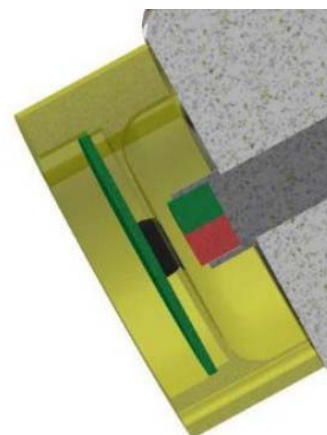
The earth's field seeking magnet is mounted on low drag bearing assembly allowing free movement
